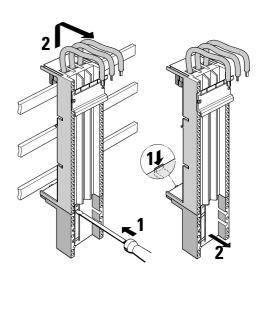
Busbar system, mounting/removal (frame sizes S00 to S2)
